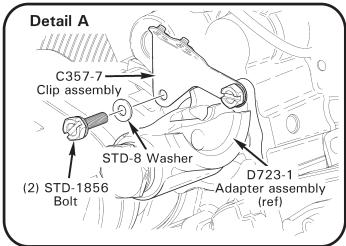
C143-5 sensor & C357-7 clip assemblies installed (with D845-3 harness assembly shown; view looking aft)
